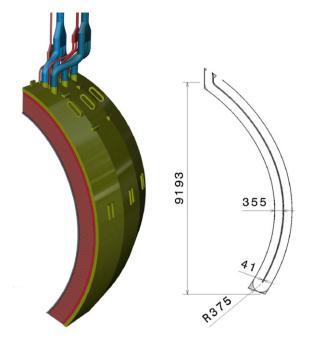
Three outboard blanket modules forming a segment (left) and module dimensions in mm (right) for the TECNO_FUS proposal from [8].
